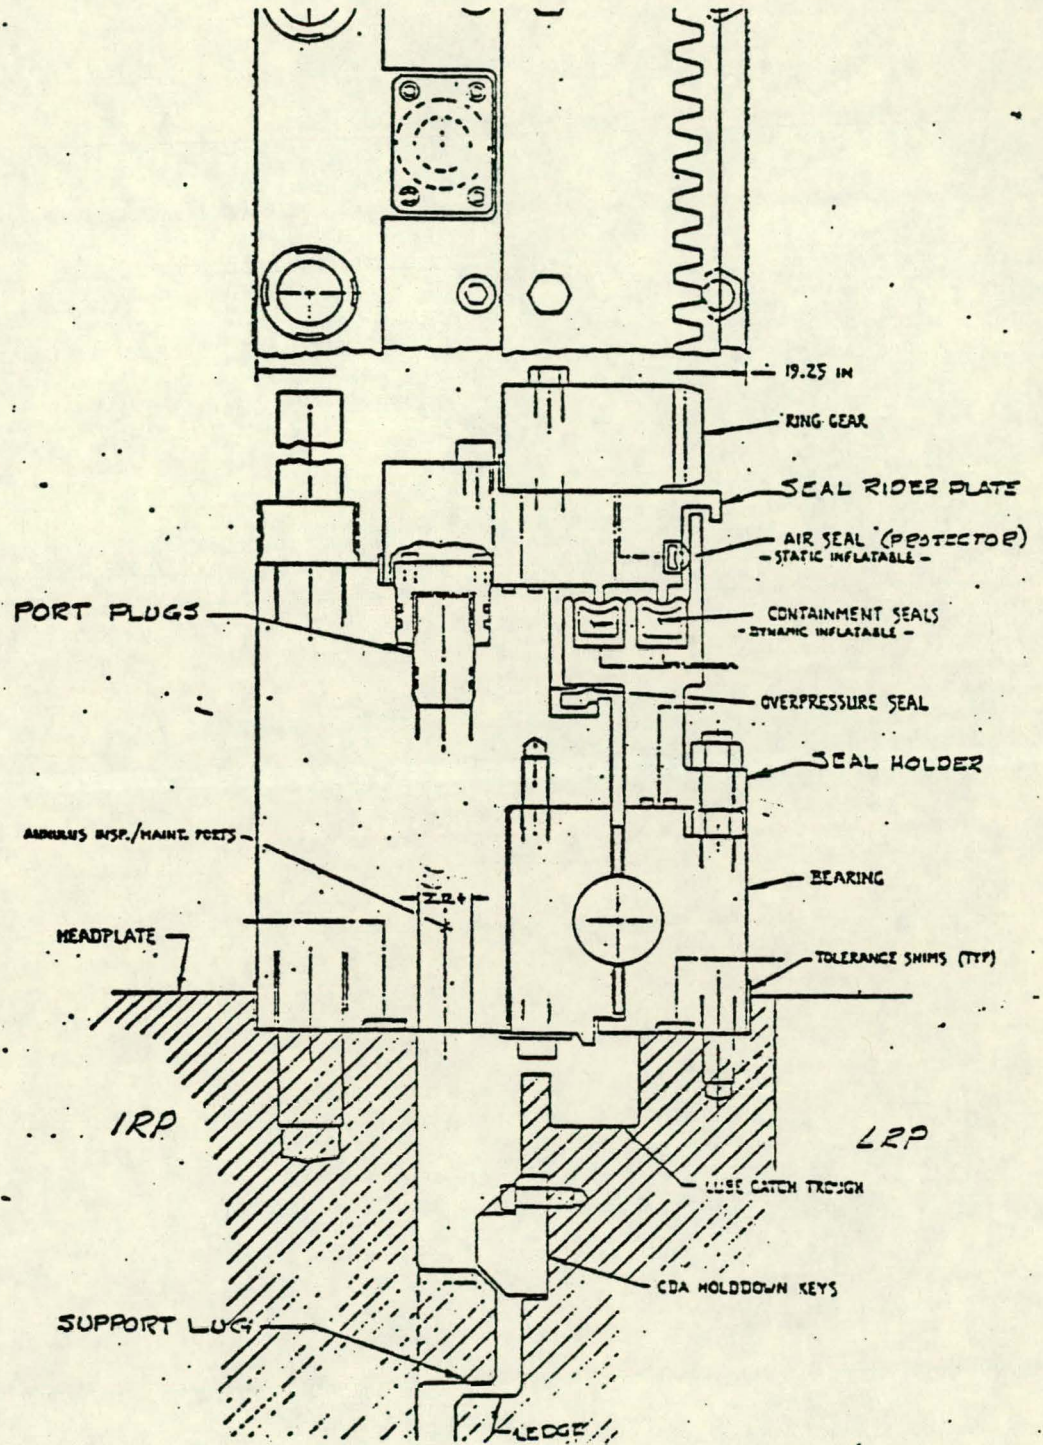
BEARING, TOP SEALS, AND SUPPORT CONFIGURATION
